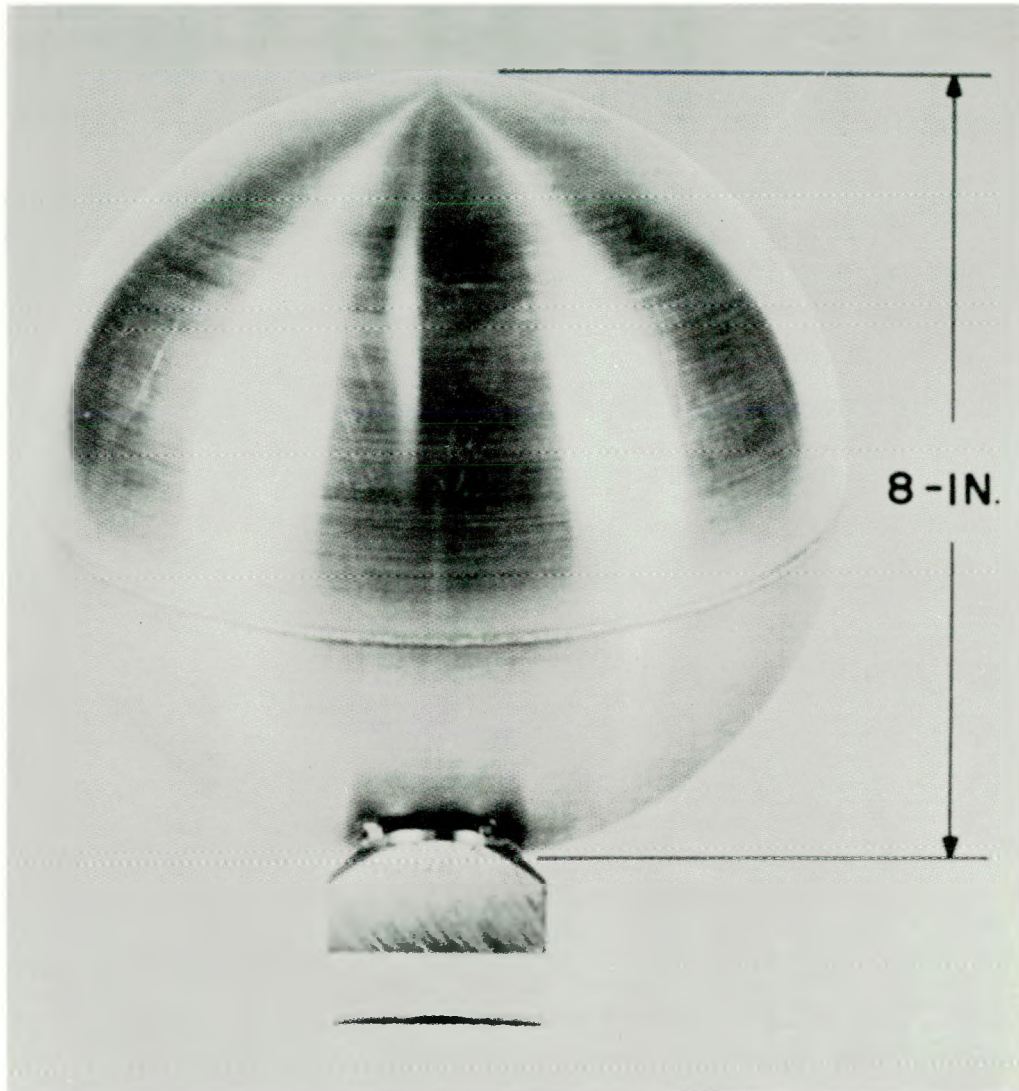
ELECTRON-BEAM WELDED PRESSURE VESSEL
